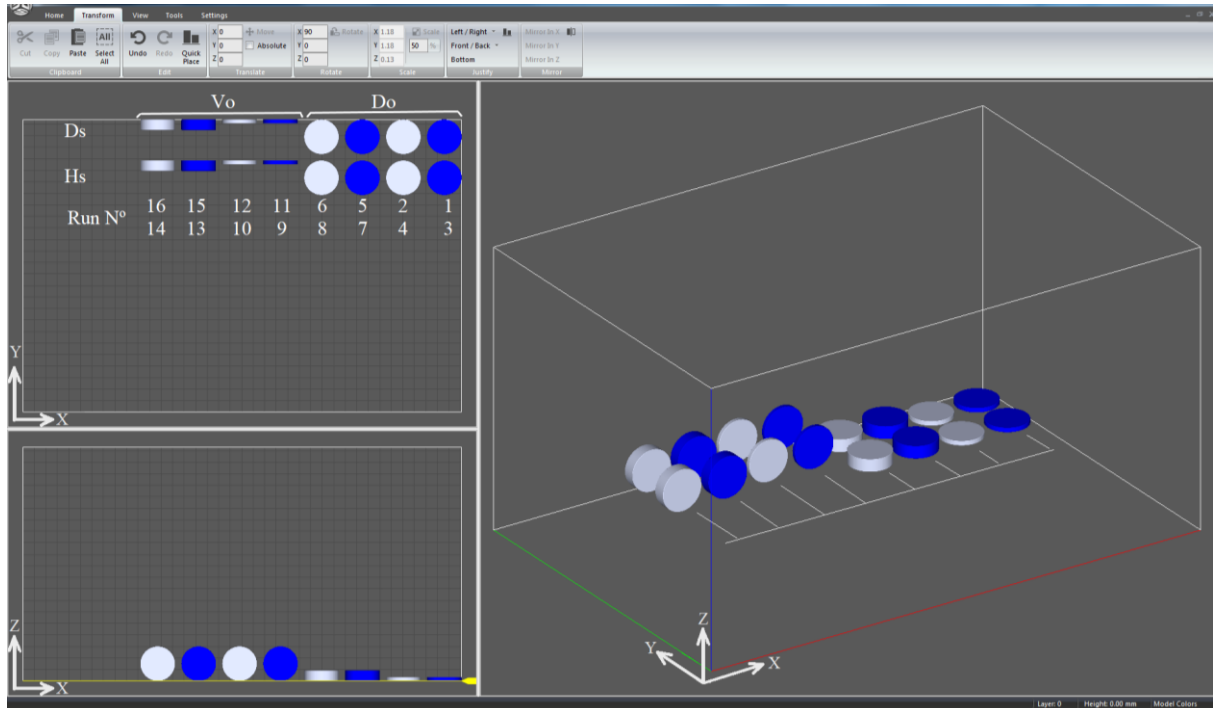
Layout of the 3DP samples in the 3D printer build chamber
